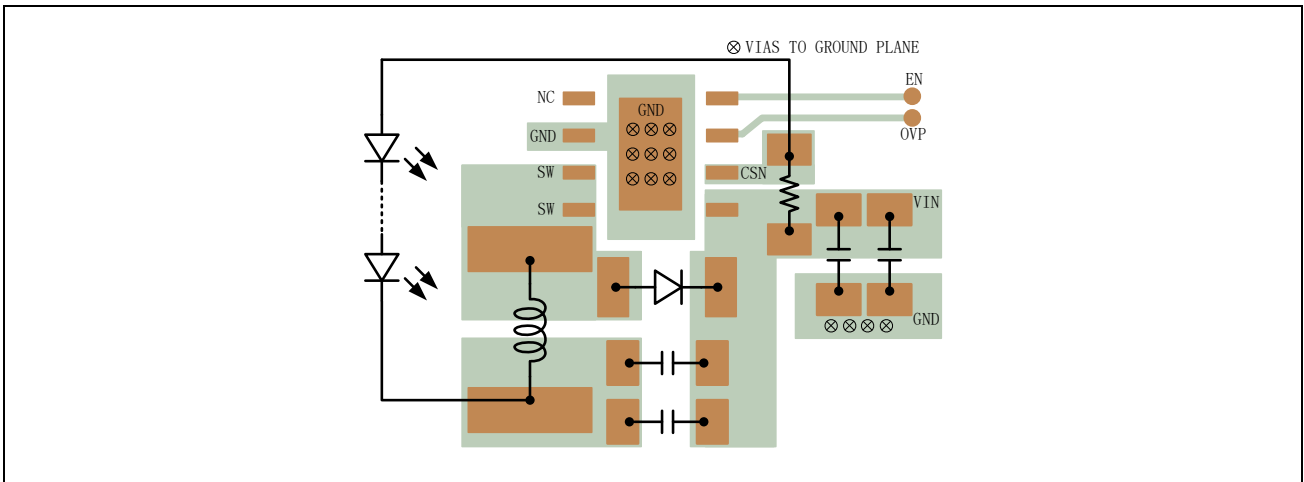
Typical application PCB layout of BUCK ESOP8 package
